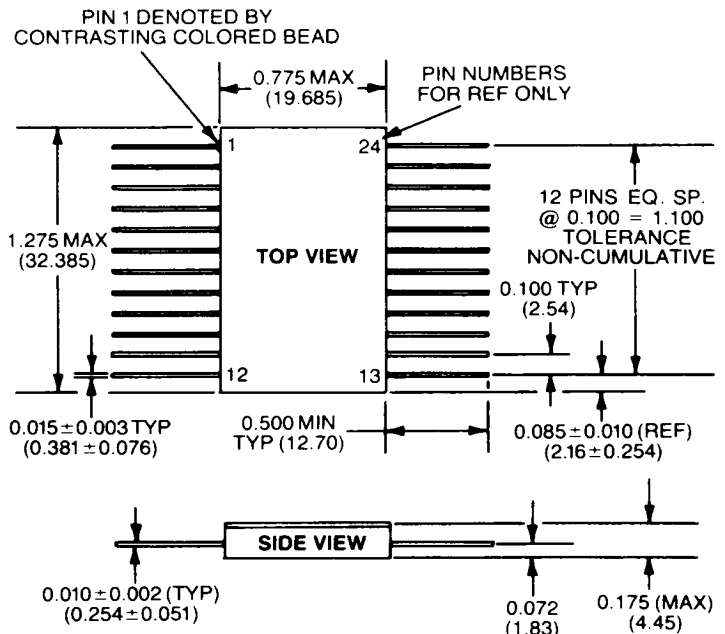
DA-02325-F MECHANICAL OUTLINE (24 PIN FLATPACK)
